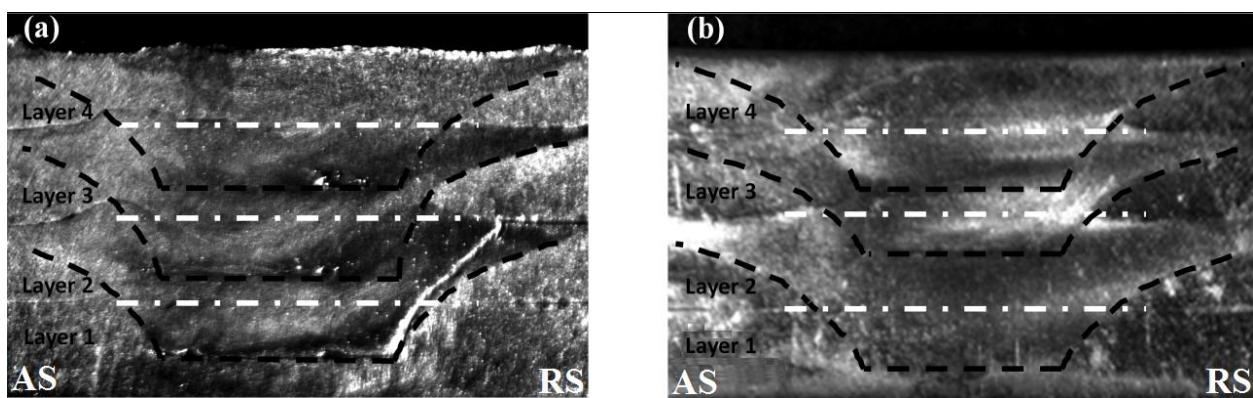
Transverse section macrograph of the friction stir welded build structures manufactured at (a) 1400/102, and (b) 800/102 specimens. Dashed horizontal white lines represent the original interface positions/locations.
